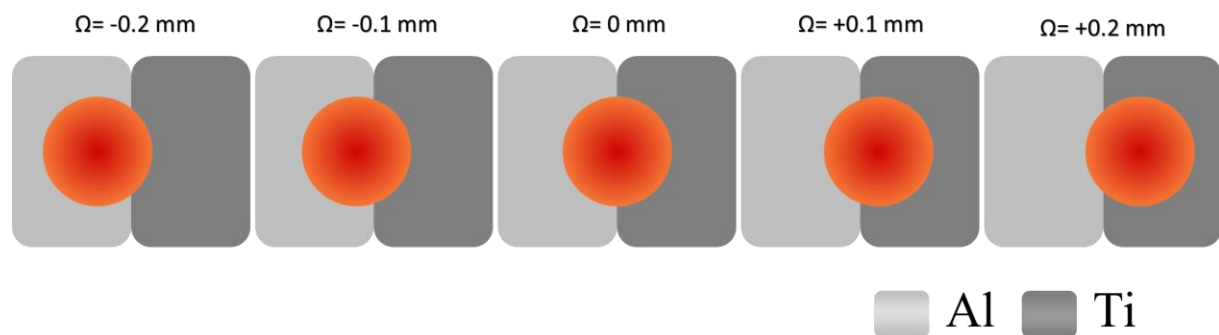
Schematic for the 5 different laser spot positions in pulsed laser welding of dissimilar materials.
